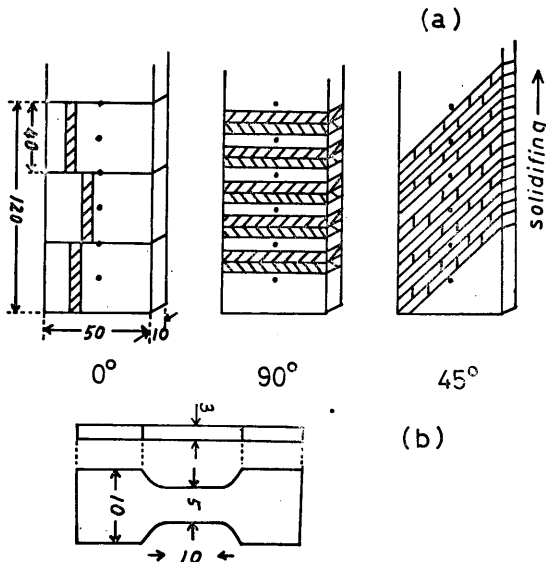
Location of test pieces for tensile test in unidirectionally solidified Al-Cu alloys (a) and the form of the test pieces (b).
